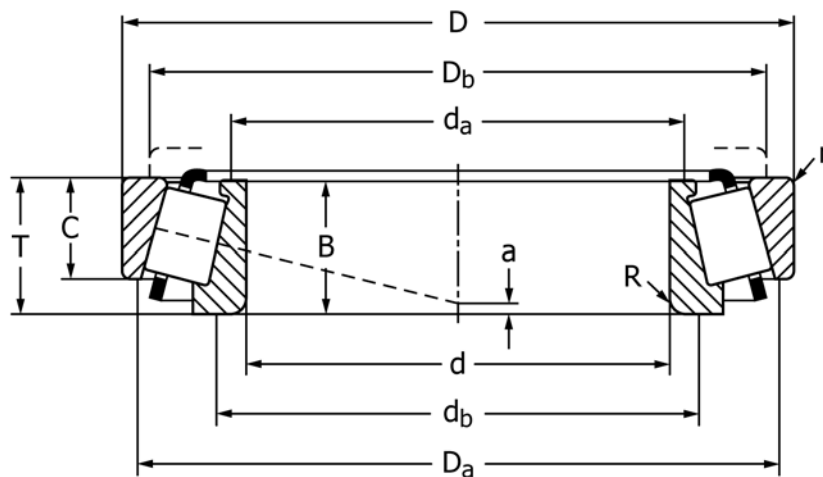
Schematic Drawing, Metric Series, Single Row, Tapered Roller Bearing
